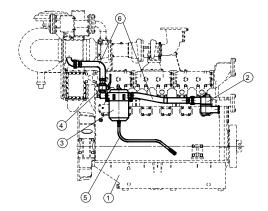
CGR on gas in-line engine FGLD/SFGLD.
